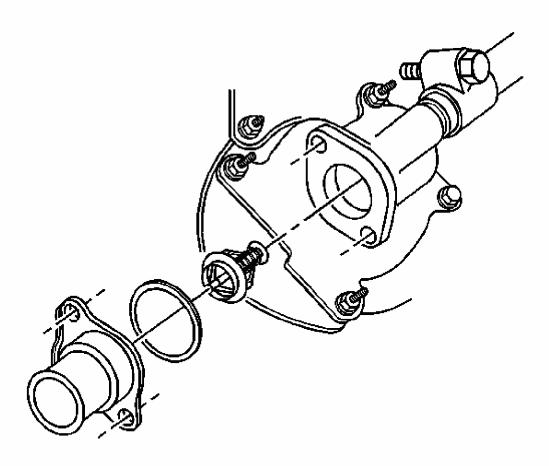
View of Thermostat & Gasket Courtesy of GENERAL MOTORS CORP.
